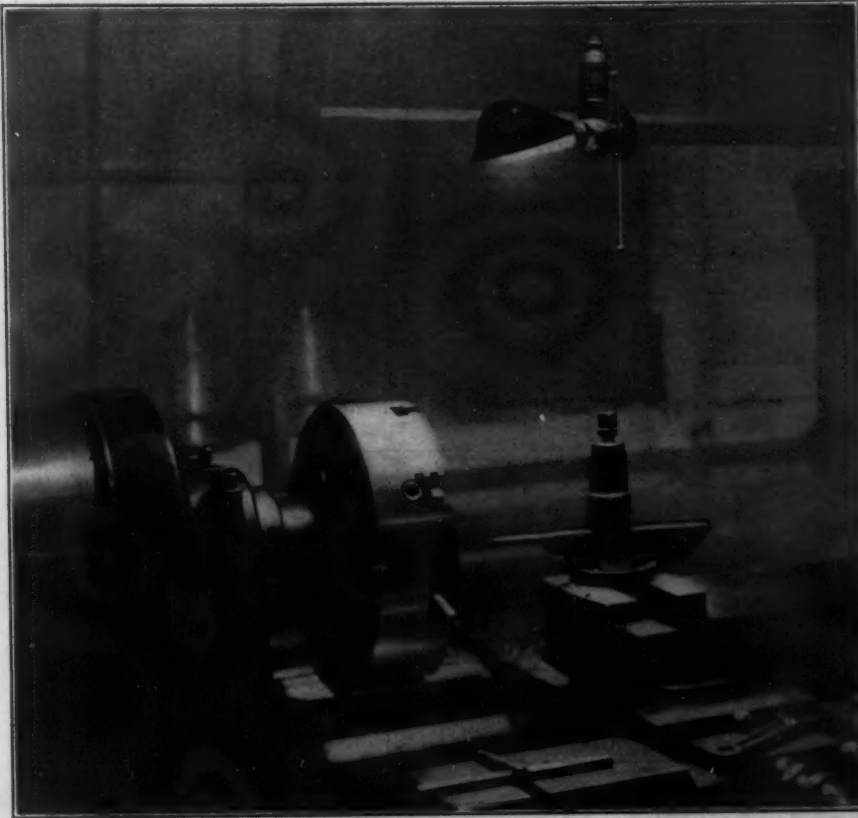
Lathe Lighting with an Outside Balance Socket and a Steel Reflector.]
